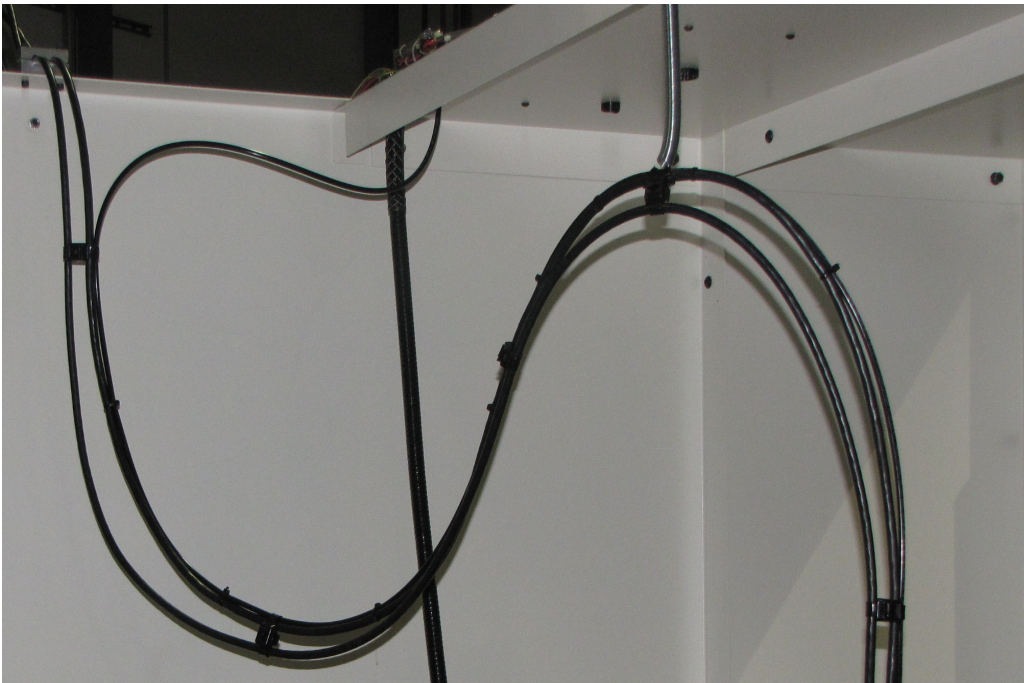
, Ensure there is enough slack for machines table to move it's complete travel with the rotary tables cables held up and out of the chip trays
